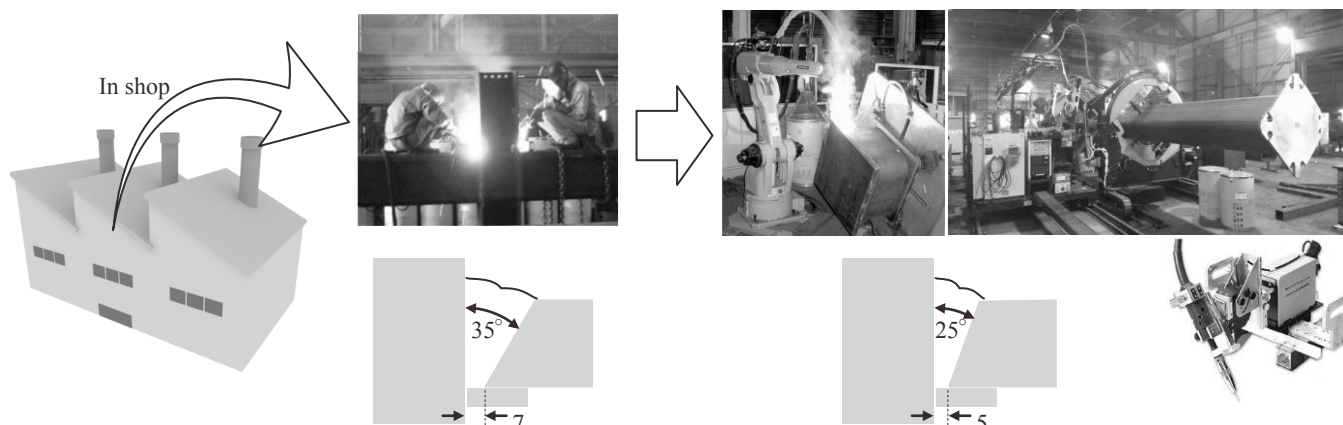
Changing from manual welding to automatic welding by robot, and welding groove shape in factory manufacture
